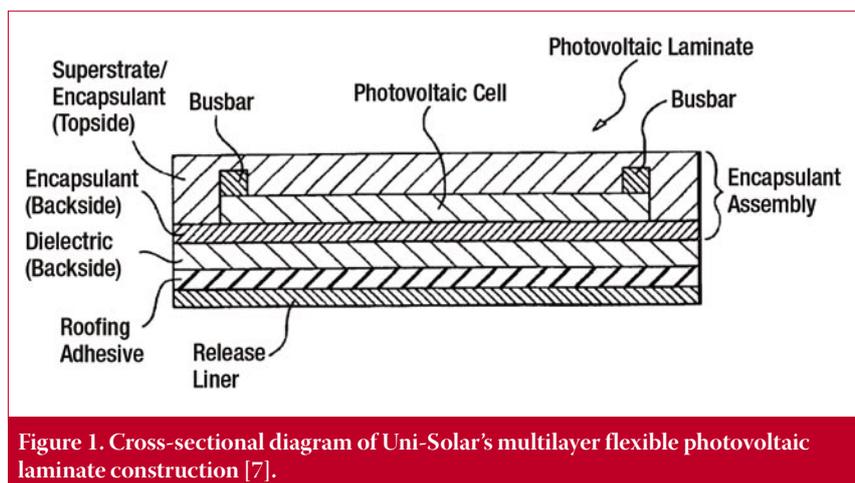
Cross-sectional diagram of Uni-Solar's multilayer flexible photovoltaic laminate construction [7].
